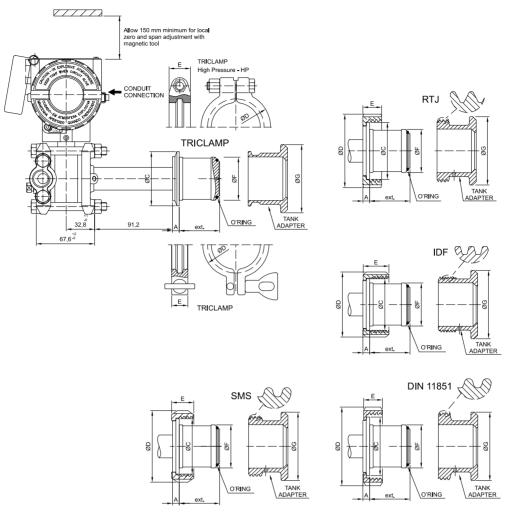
(e) – Dimensional Drawing and Mounting Position - Sanitary Transmitter without Extension
